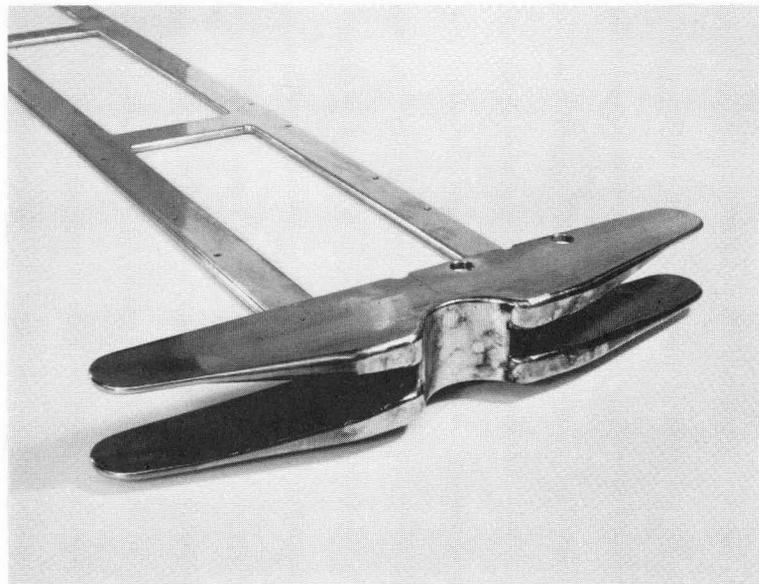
Dee insert for axial injection mounted on its tray. Material is inconel
